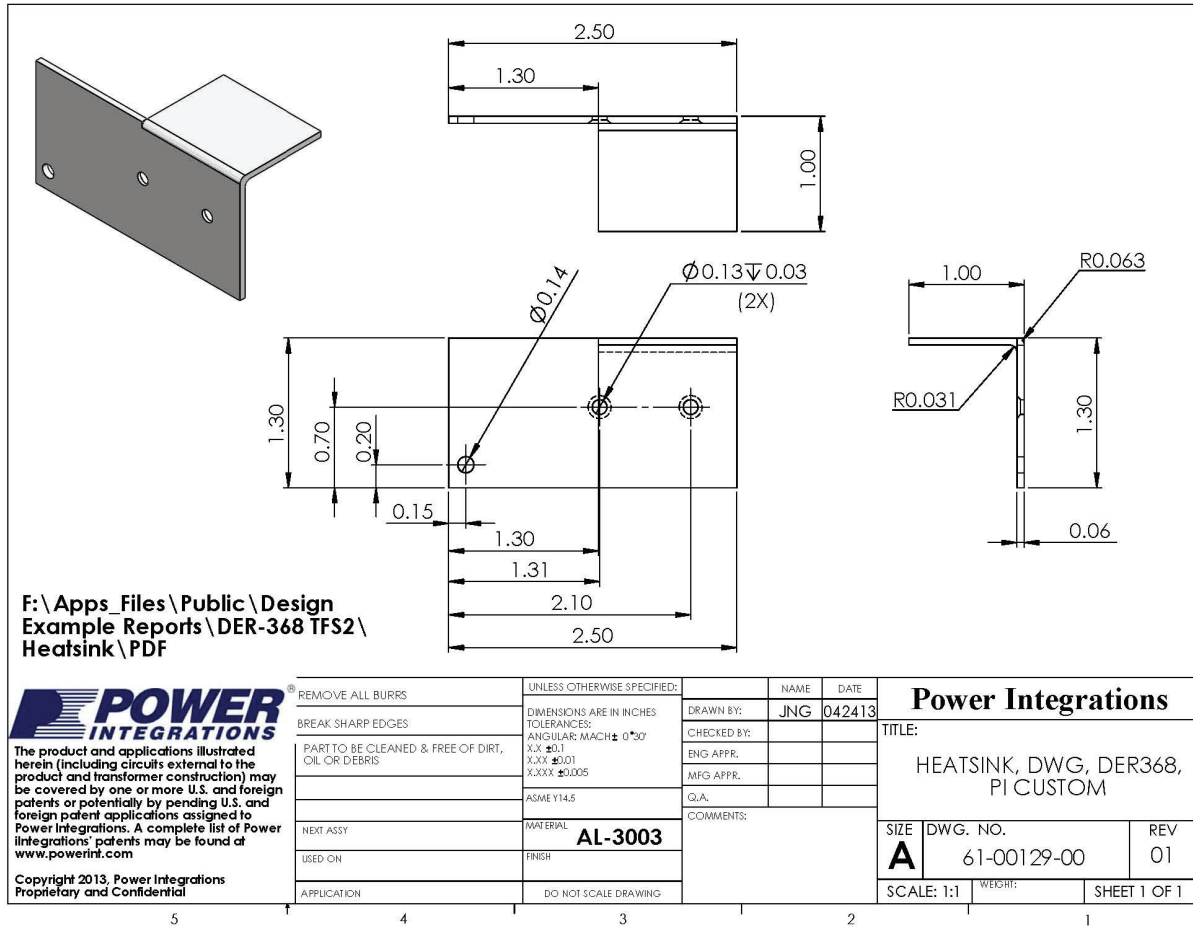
Secondary Heat Sink Sheet Metal Drawing.
